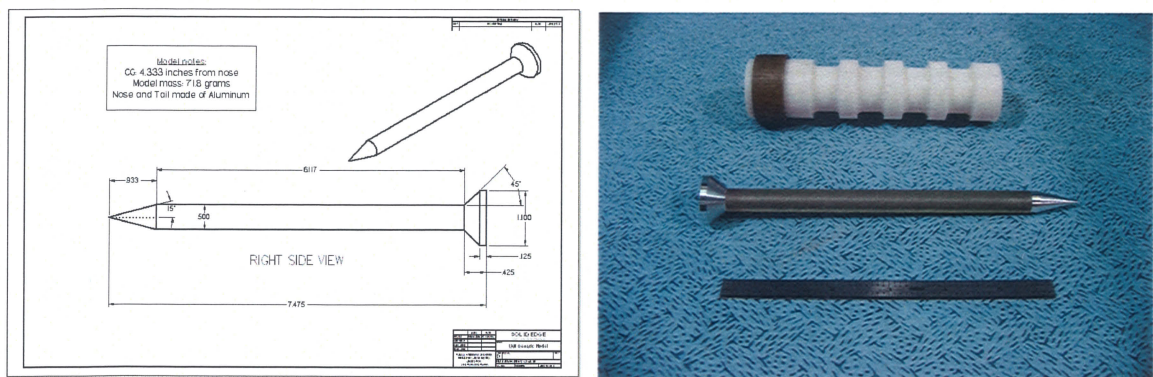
Baseline 0430 ARC Projectile Geometry (dimensions in inches) and Machined Projectile
